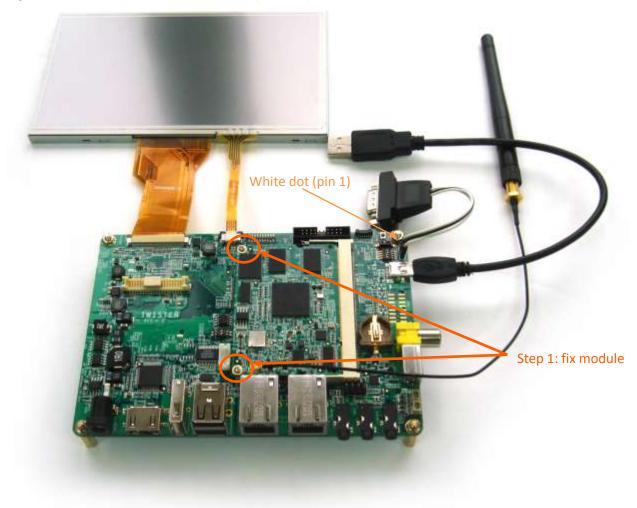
Step 1 - After clicking the module onto the board. Use a small Philips screwdriver and fix the module on the interface board. By doing so you guarantee the connection is firm and solid.
